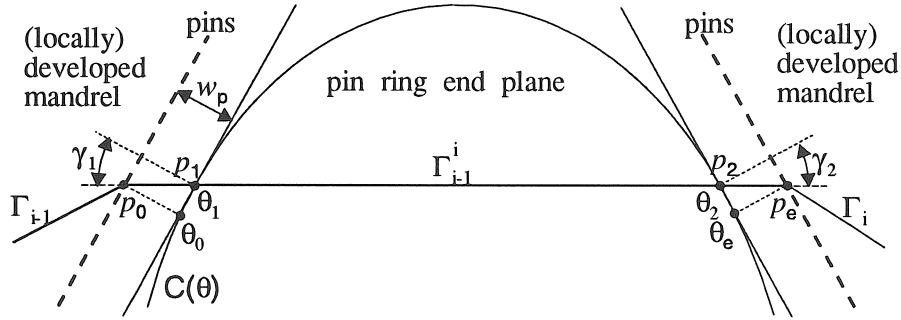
Developed fibre path behind a pin ring (without intersection with the end shaft of the pin ring) for a pin ring with a general cross-section
